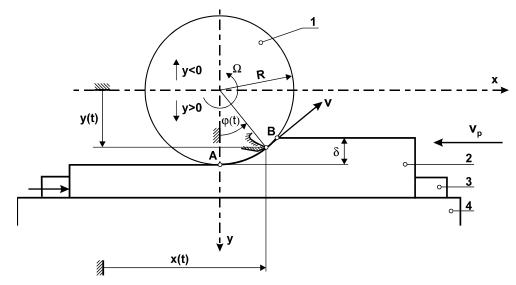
Schematic illustration of milling process treatment 1 -cutter; 2 - processed object; 3-holding circuit tool; 4 - cutter worktable
